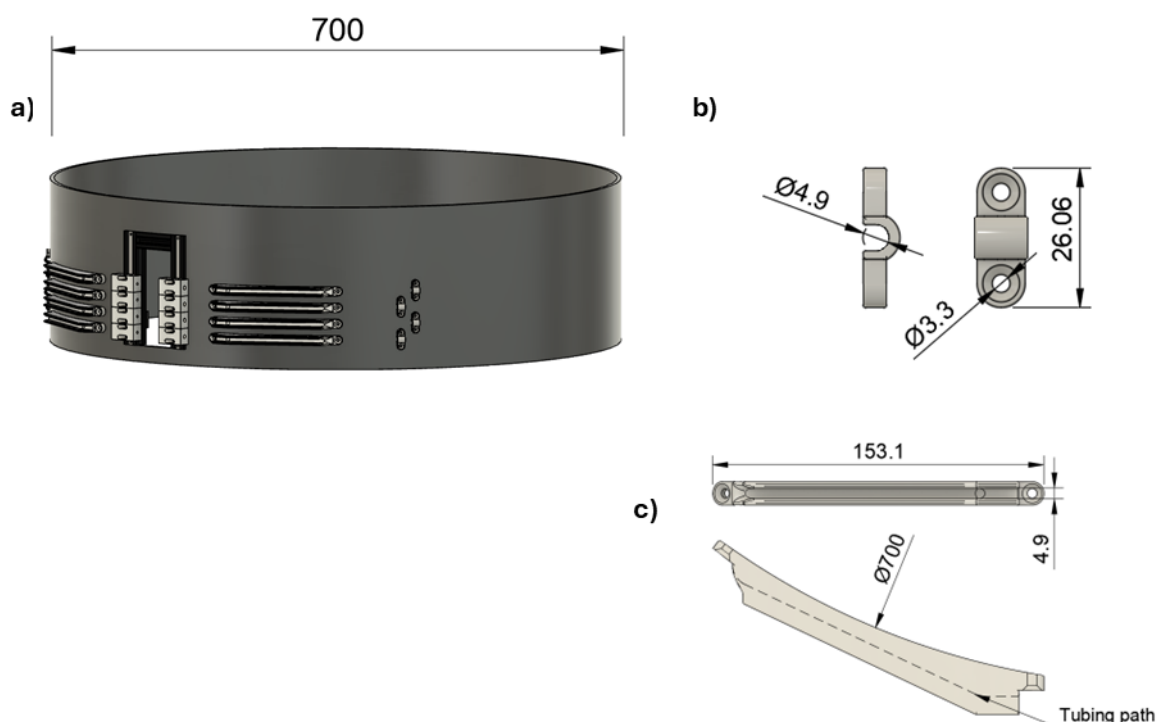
CAD drawings with measurements in mm for a) assembled KRAIC-XI design with drum body, X-ray window frame with Kapton unions, and tubing guiding and holder pieces, b) tubing holder piece design, and c) tubing guiding piece.
